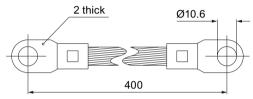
Dimension drawing of grounding cable, dimensions in mm
